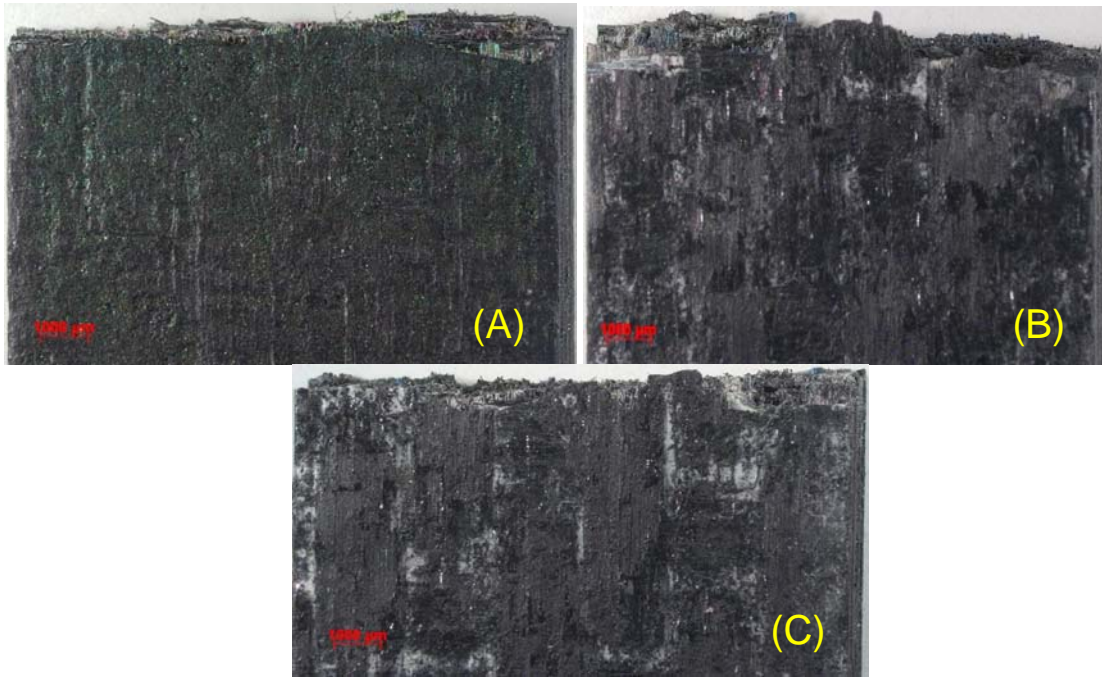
Fracture surfaces of composite C2 specimens fatigued in air at 1300 °C, Maximum Fatigue Stress Level: (A) 180 MPa, (B) 160 MPa, and 140 MPa (C).
